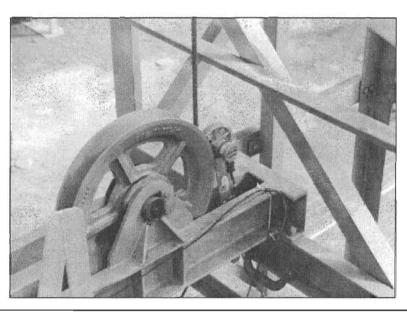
Take-up displacement—Optical encoder mounted on take-up sheave
